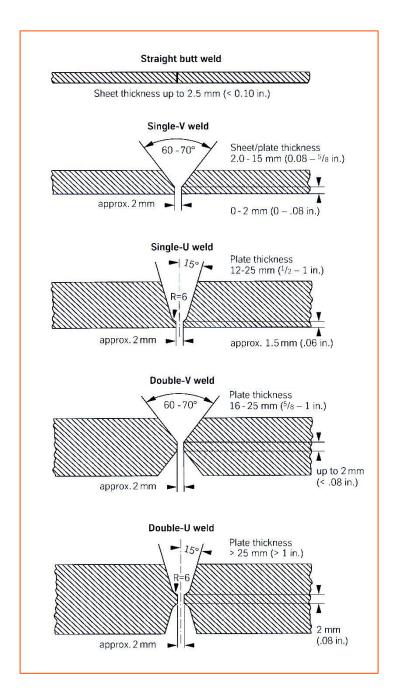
Edge preparations for welding nickel alloys and special stainless steels
